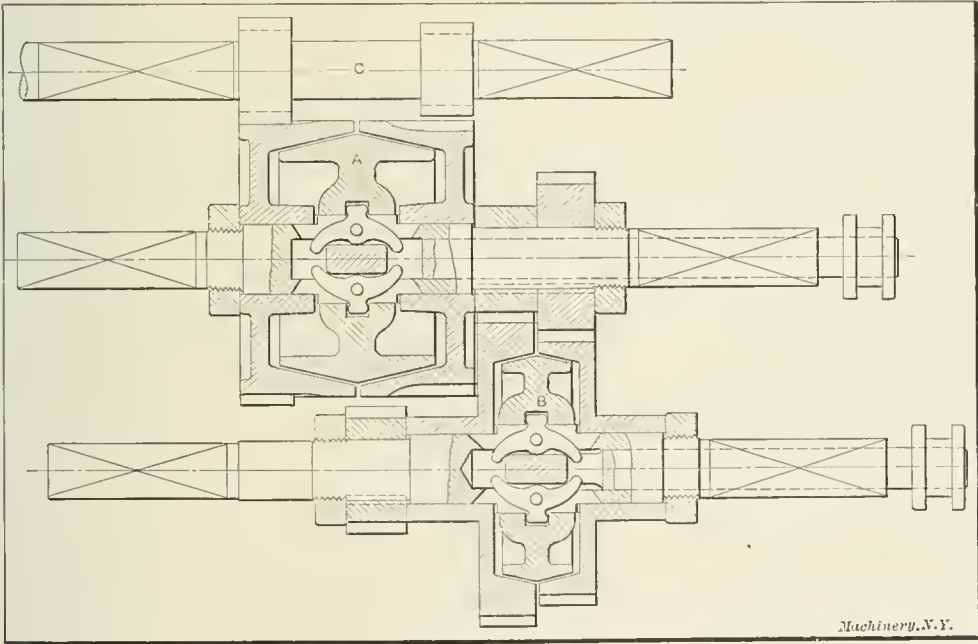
Design of Geared Turret Lathe Head, with Reversing Friction Clutch
